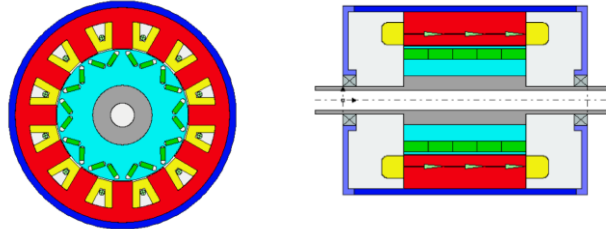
Radial and axial cross section of the motor with in-slot oil cooling (ISOC). The flow of oil is parallel to the axis of the rotation.
